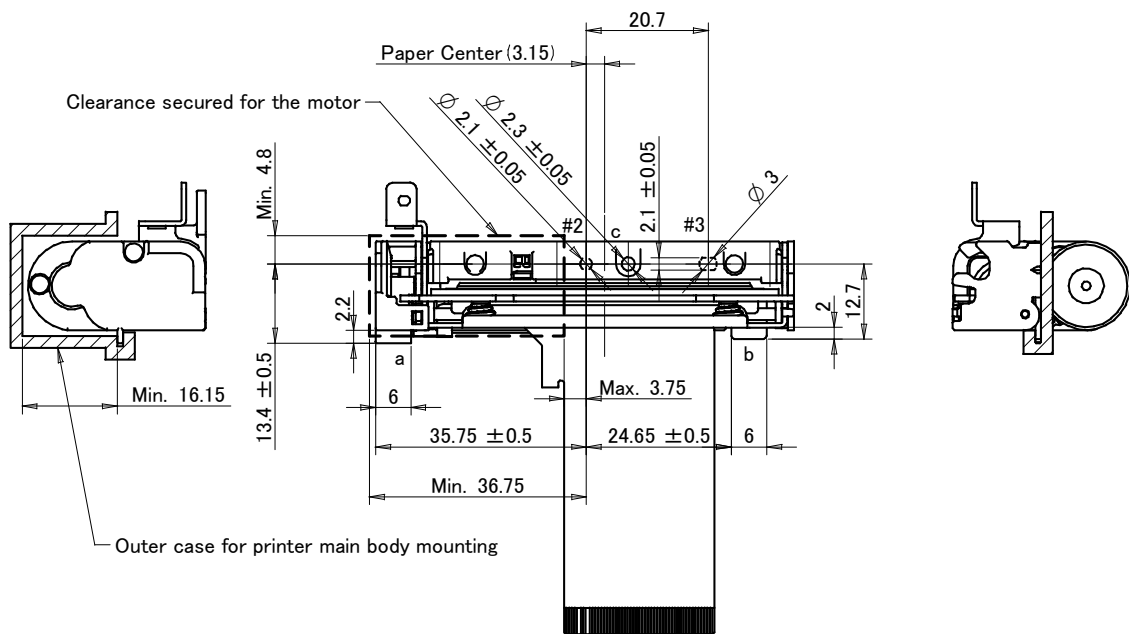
, Figure 6-2, Figure 6-3 and Figure 6-4 show dimensions for positioning and securing the printer main body.
